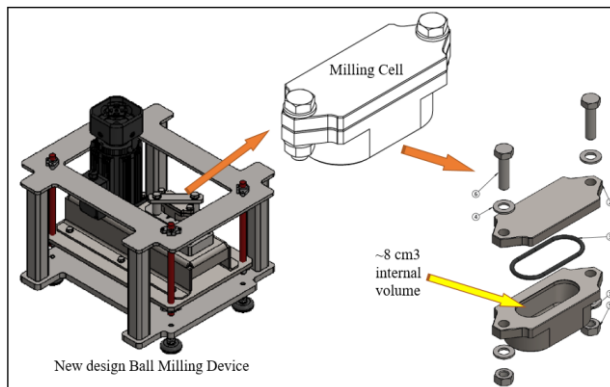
General view of the compact ball milling device, including the 3000-rpm motor, belt–pulley assembly, and the custom AISI 2379 milling cell (≈ 8 cm³ internal volume).
